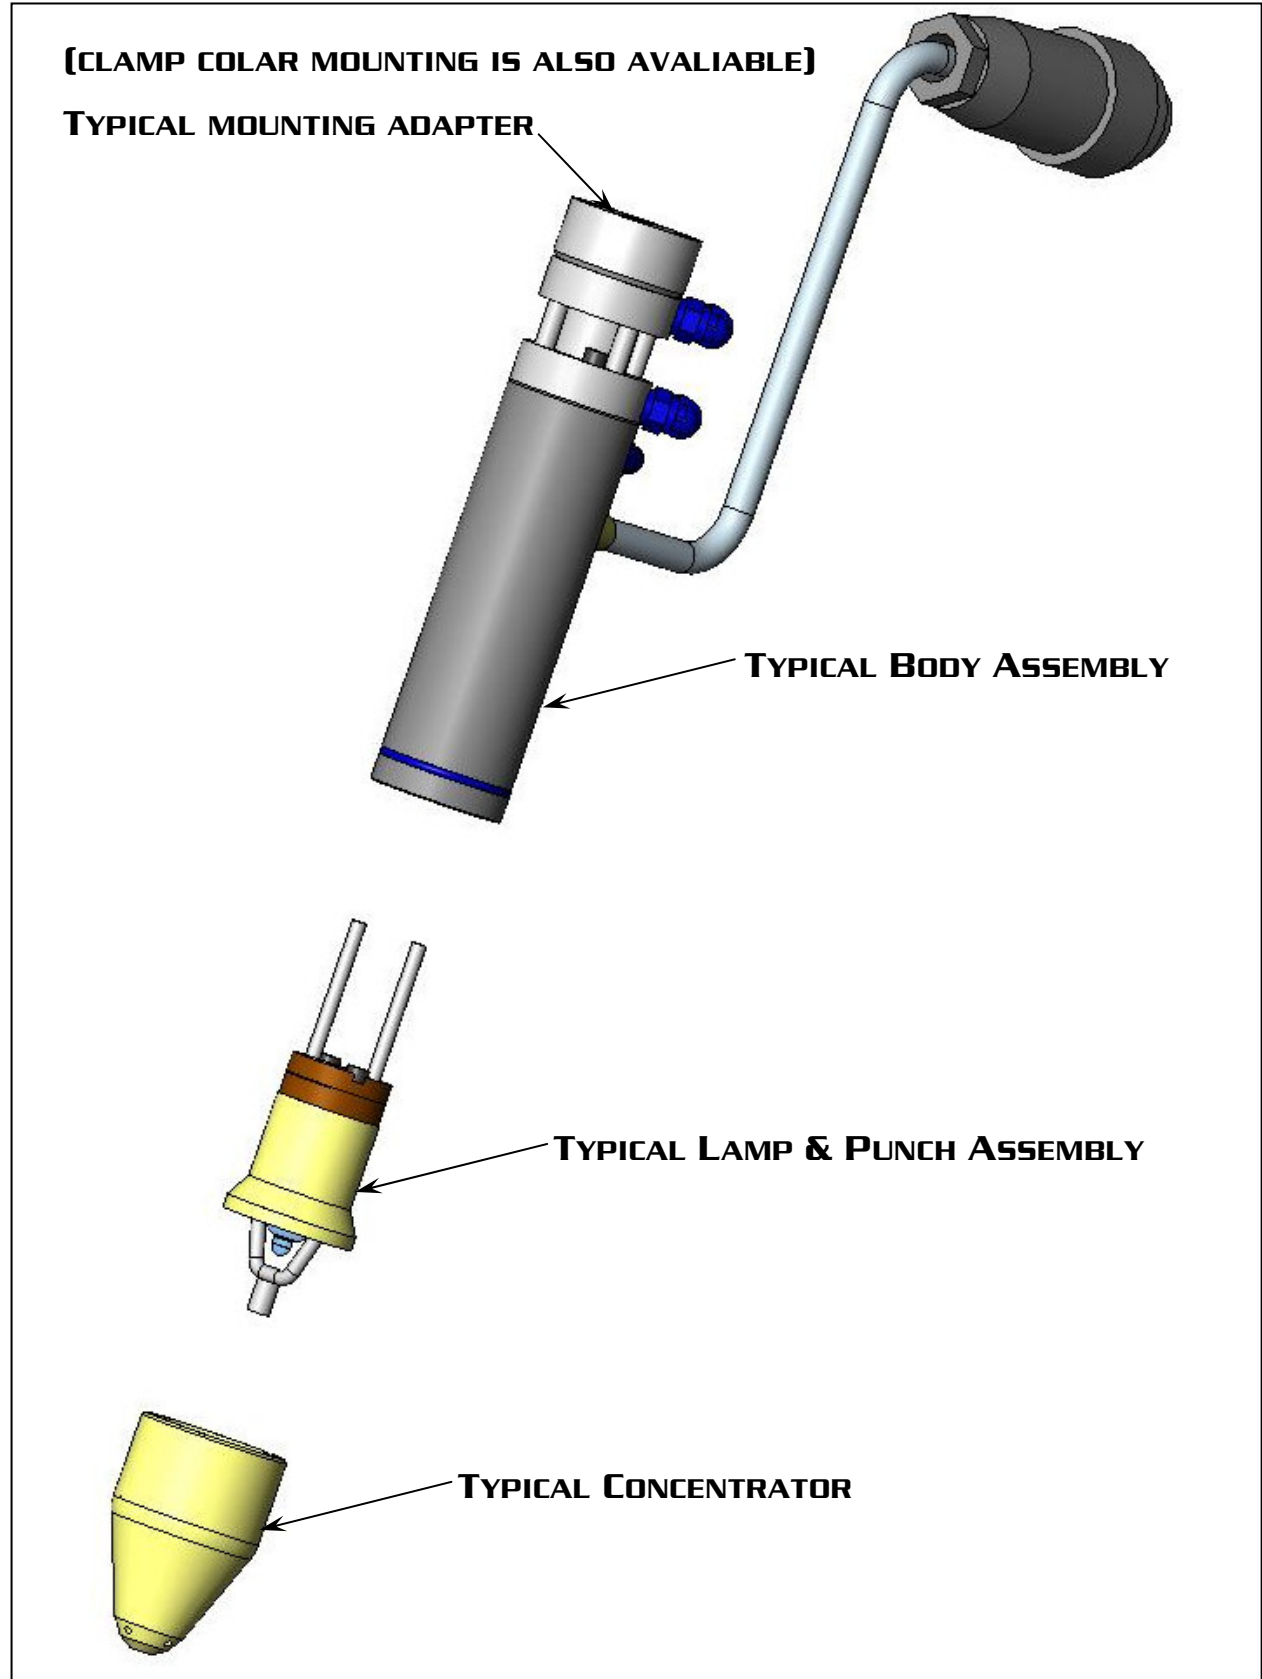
INFRASTAKE HEAD: EXPLODED VIEW
